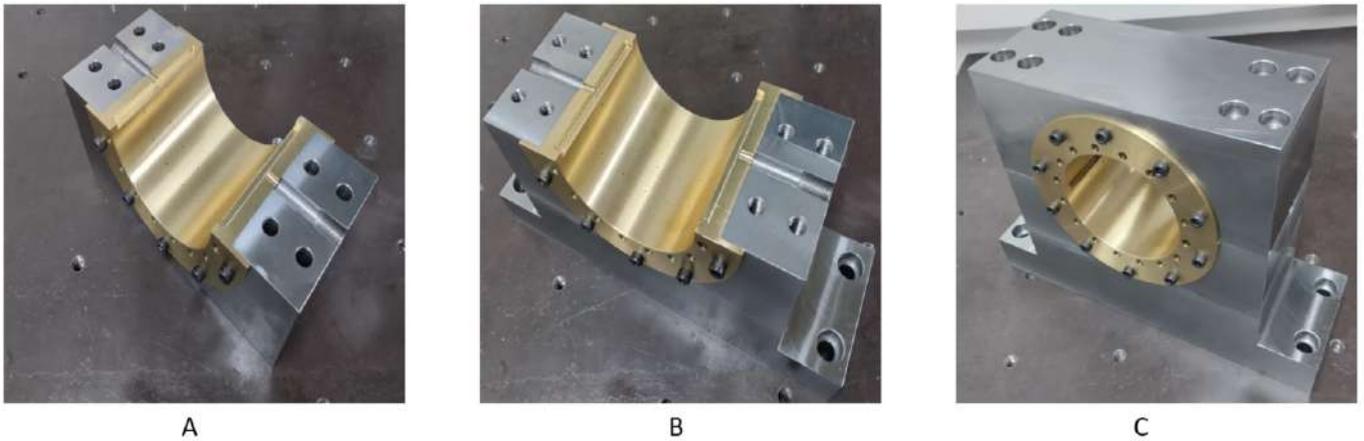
A: upper pad fixed to the upper cover; B: lower pad fixed to base; C: complete bearing
